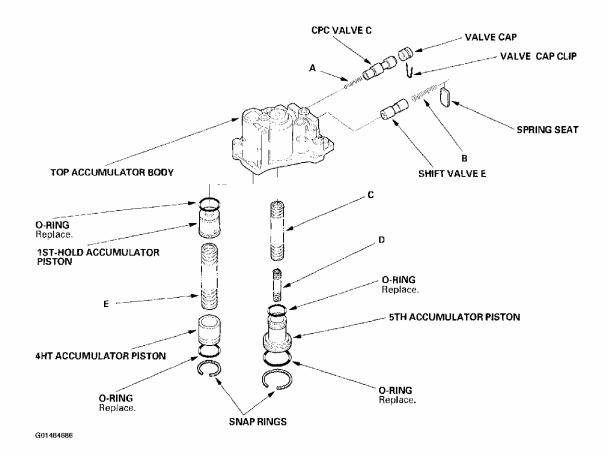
Exploded View Of The Top Accumulator Body Courtesy of AMERICAN HONDA MOTOR CO., INC.
